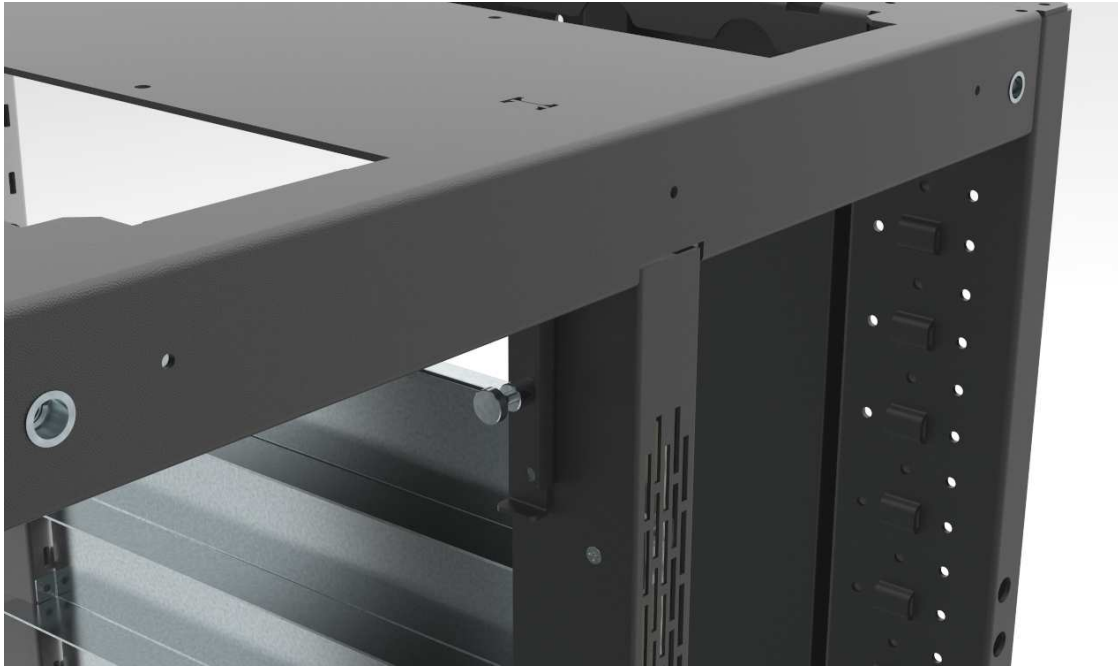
Image showing rear top of rack, busbar fitted with jig plate.
